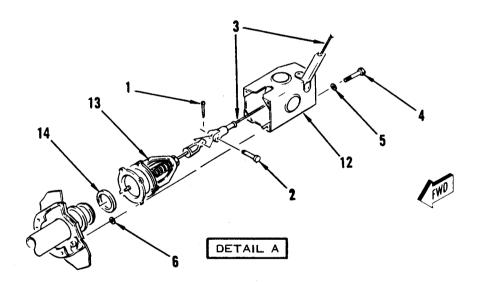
Removal; Aft Fuselage Tank (Sheet 3)
